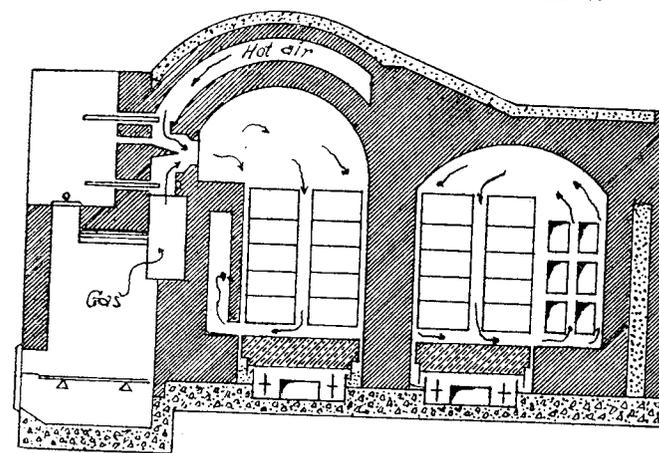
Cross section of double tunnel Zwermann kiln. (After Lovejoy.)
